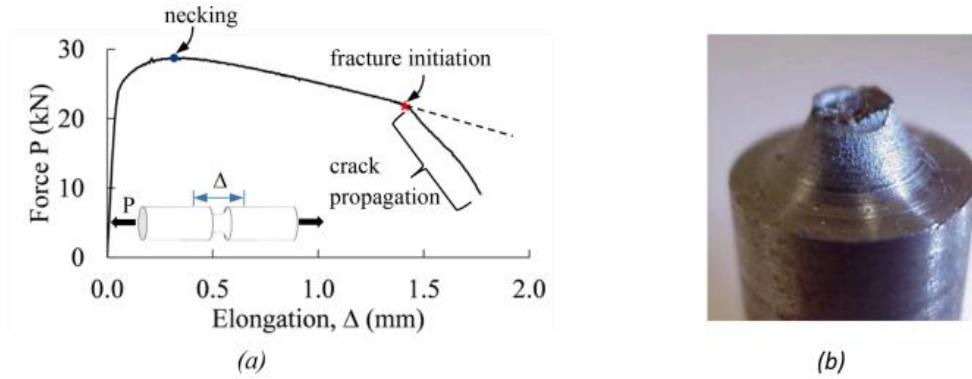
Force elongation curve for Grade 70, Test 2, CNT specimen with $RN = 3.2$ mm, and (b) fractured specimen showing cup-cone fracture surface.
